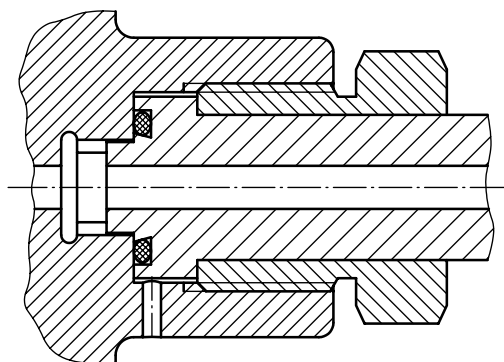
300 bar gas withdrawal connection — Assembly drawing
